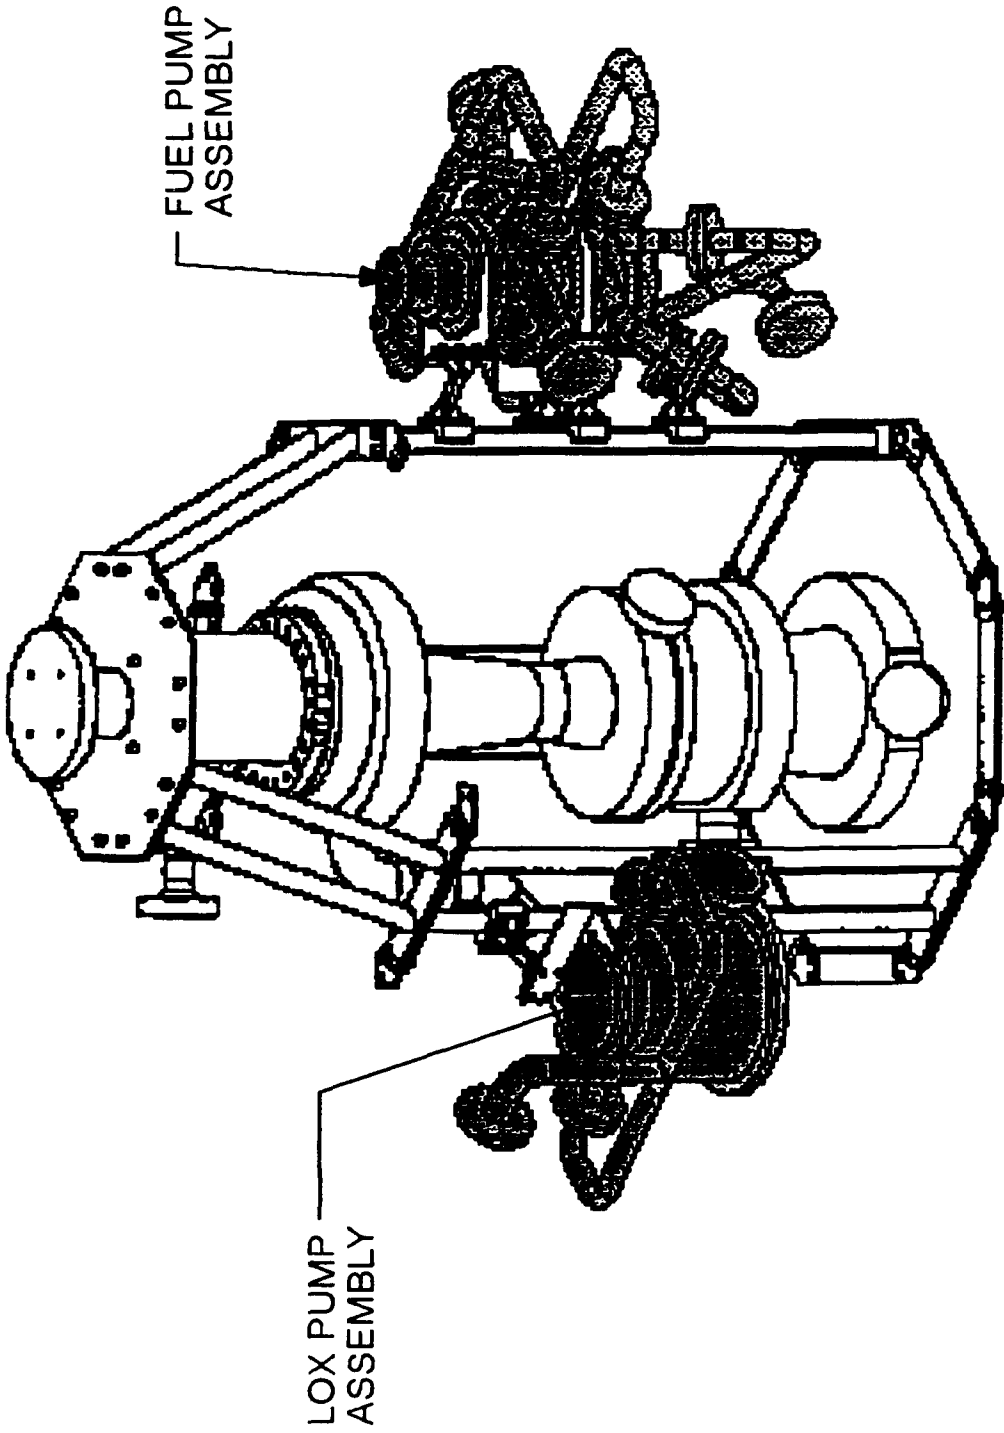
Oxygen and Fuel Pump Assemblies Attached to Frame
